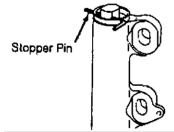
Installing Tension Adjuster Rod Stopper Pin Courtesy of Subaru of America, Inc.
